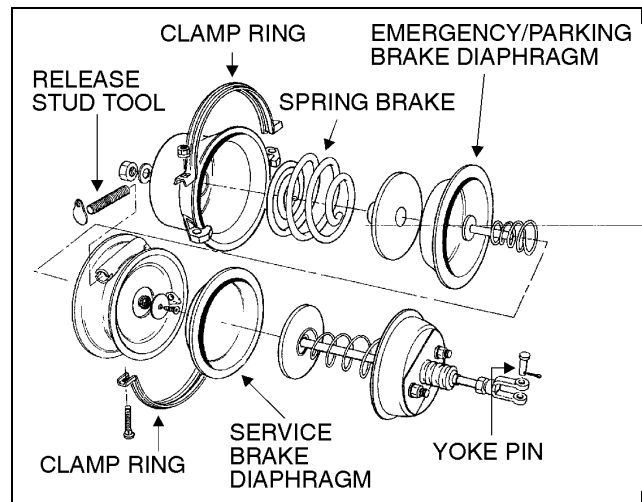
BRAKE AIR CHAMBERS ASSEMBLY 12048
